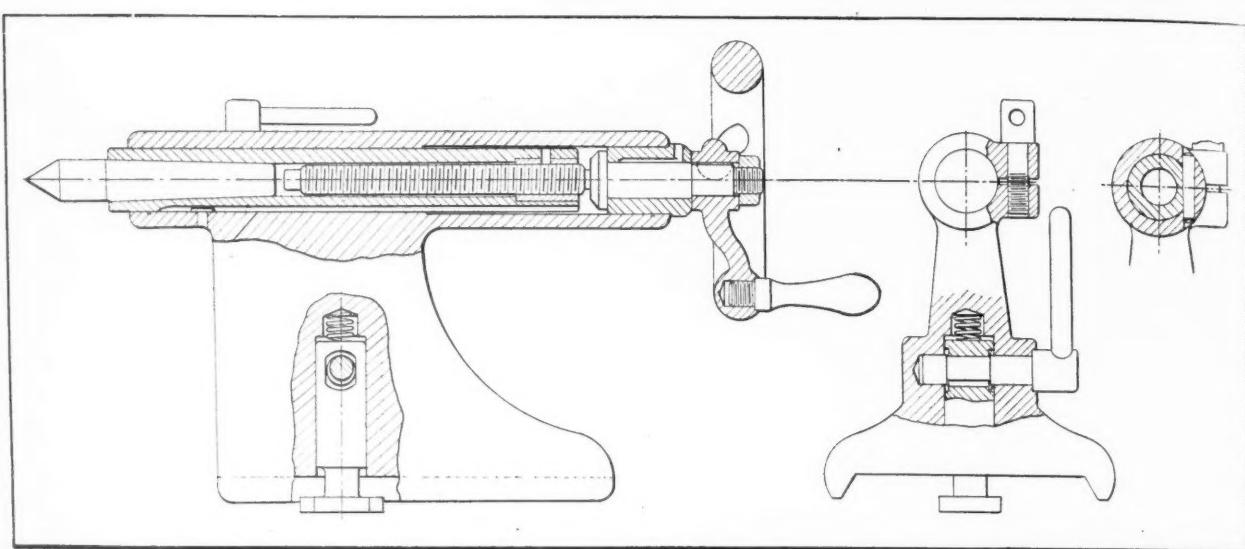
Design of Tailstock used in a Small Bench Lathe
